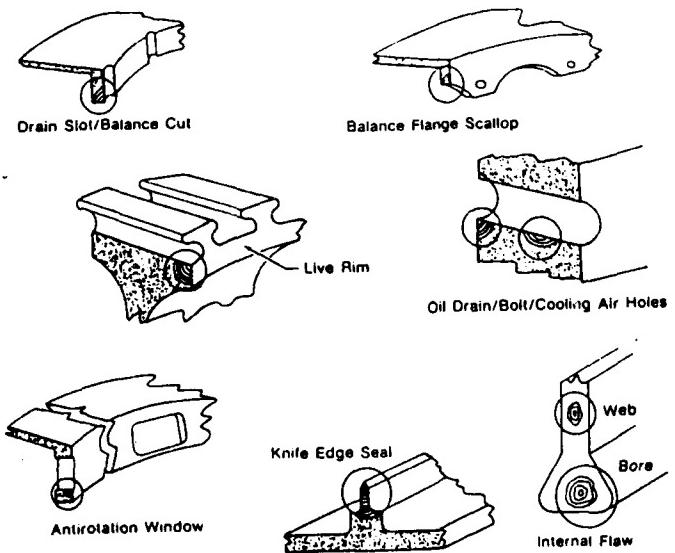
Typical Flaw Types to Be Detected in Fighter Engine Rotor Components
